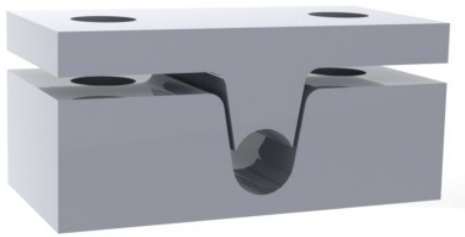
A 3D model of the two part screw-clamp. The thickness of both parts is 4mm. The notch for the evaporation tube has a diameter of 1.6mm.
